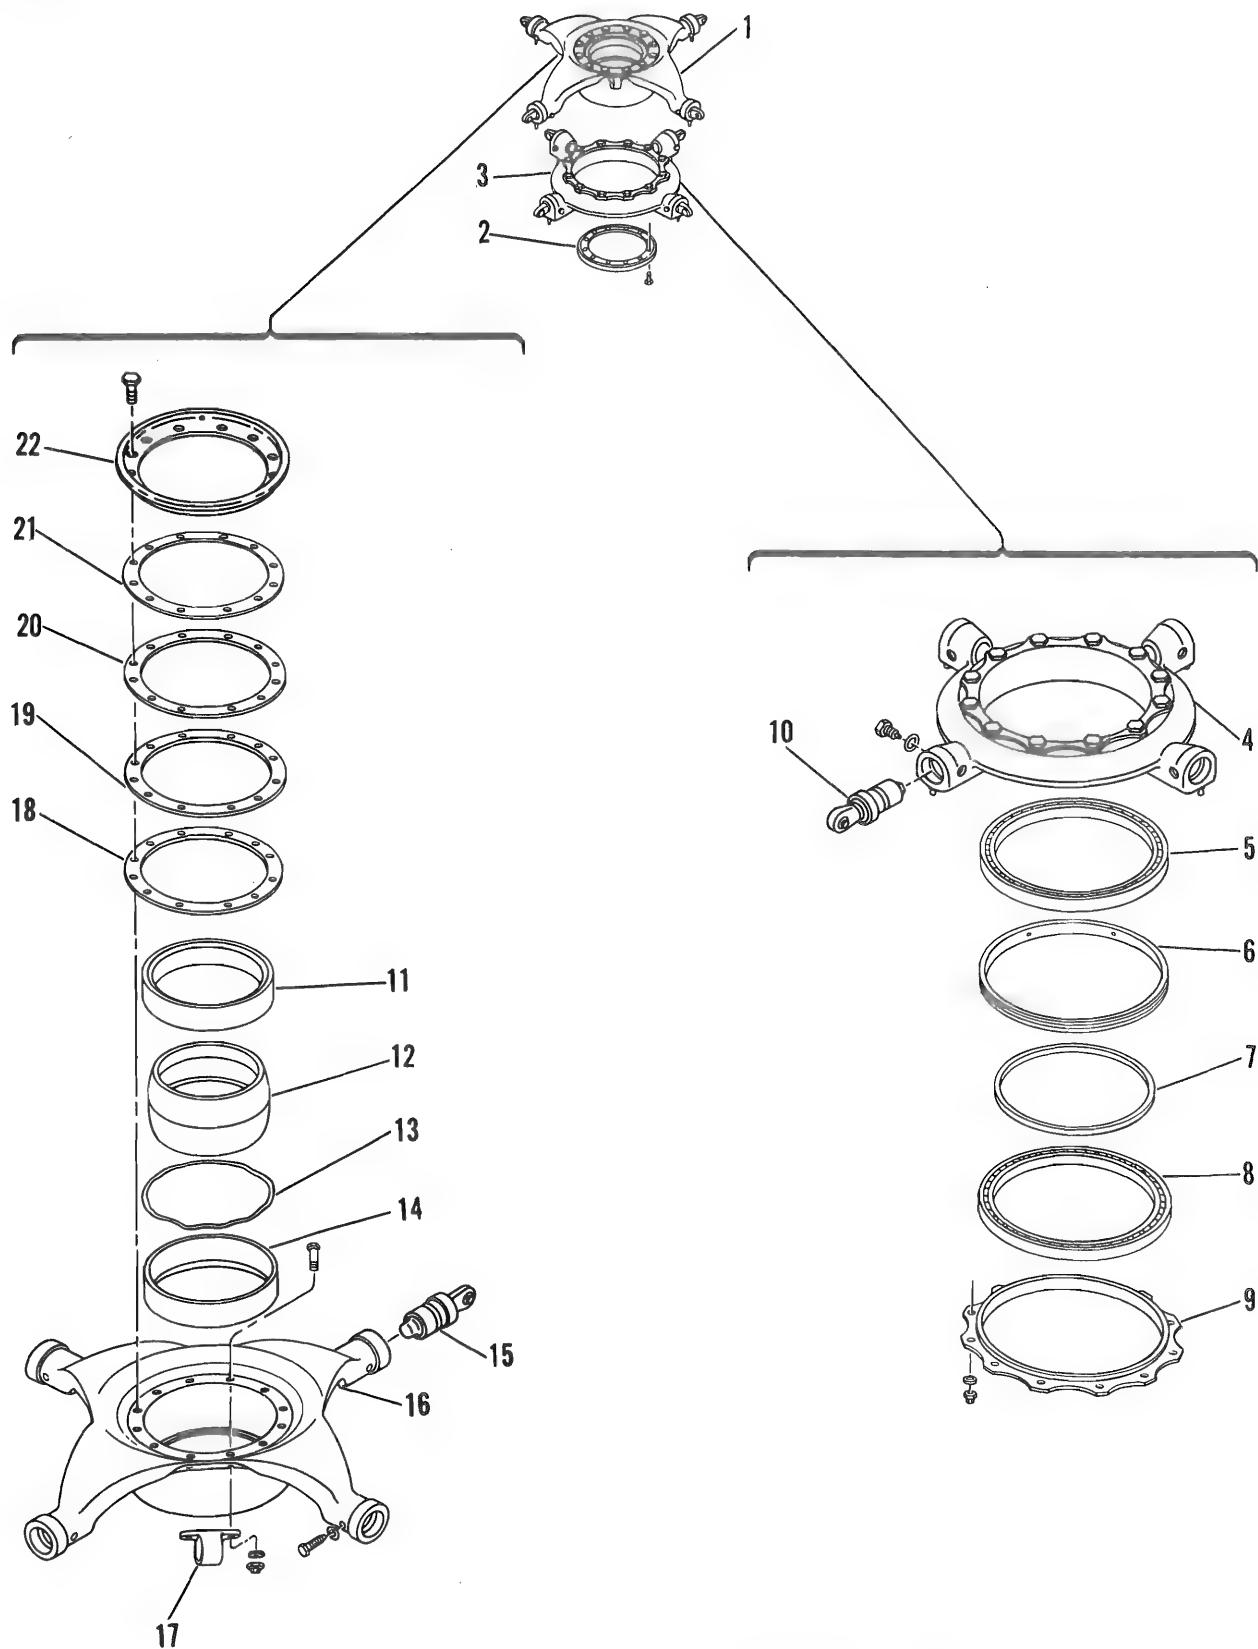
Star Assembly - Disassembly (Sheet 1 of 2)
